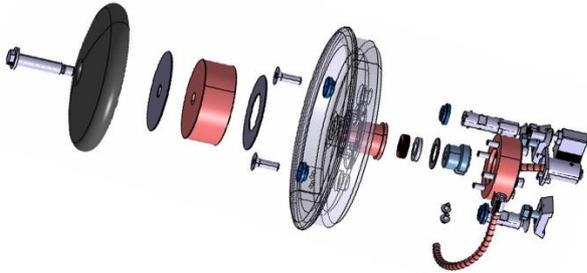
AUG glow electrode, exploded assembly drawing (main components from left) TZM screw, tungsten-coated graphite anode, alumina isolation with graphite foils, stainless steel housing.
